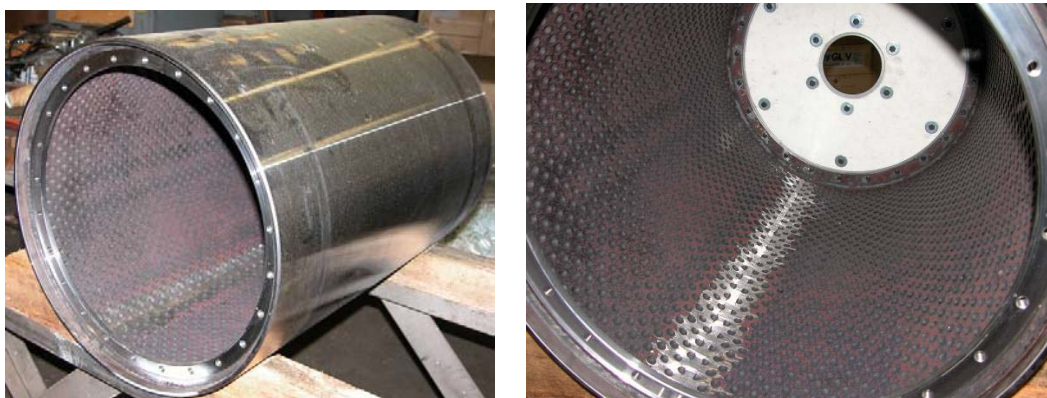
Pilot-Scale GFPD Design (Cross-Section of the Dryer Drum)
